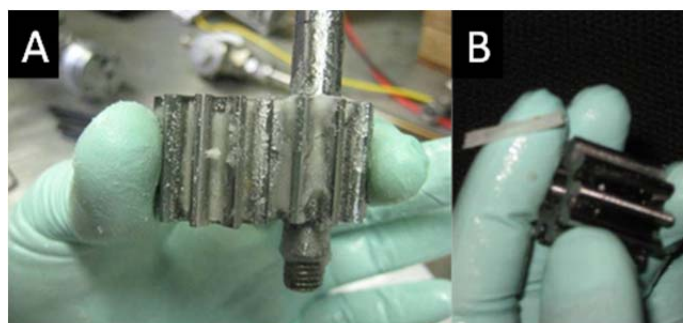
Slivers of Fresh Ammonia Borane Solids Compressed by the Interlocked Gears of the Mahr Gear Pump Caused the Pump to Stall
